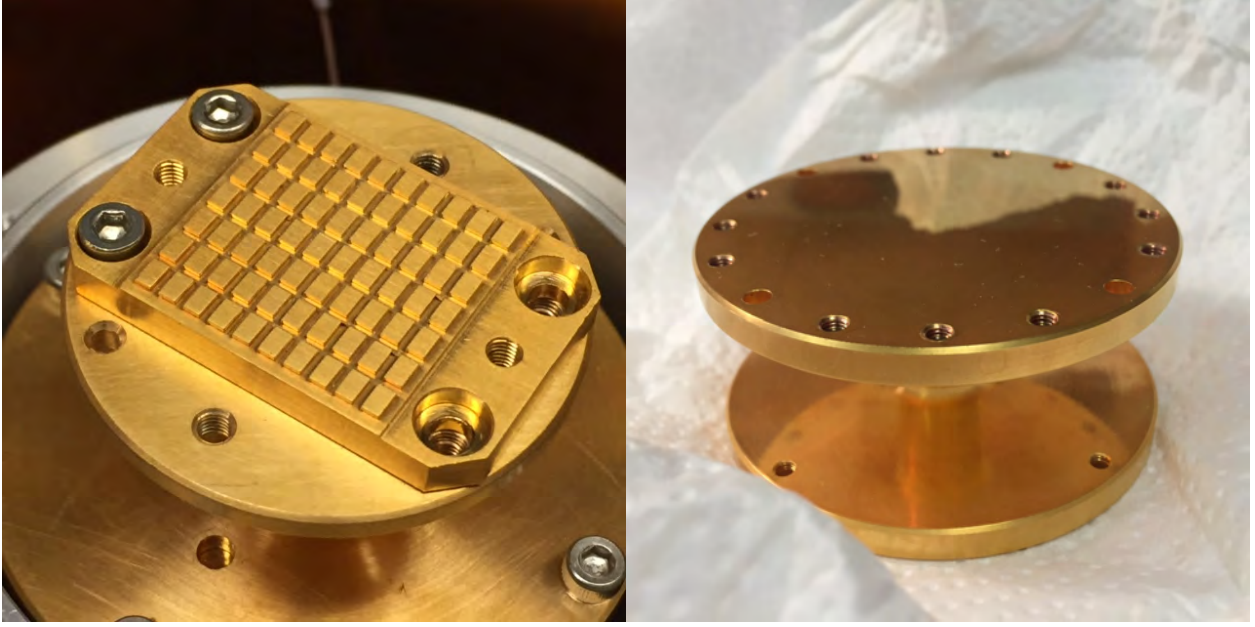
Left: Typical two-part sample stage with removable waffle-patterned sample holder. Right: New sample stage machined from a single piece of OFC designed as part of this study.
